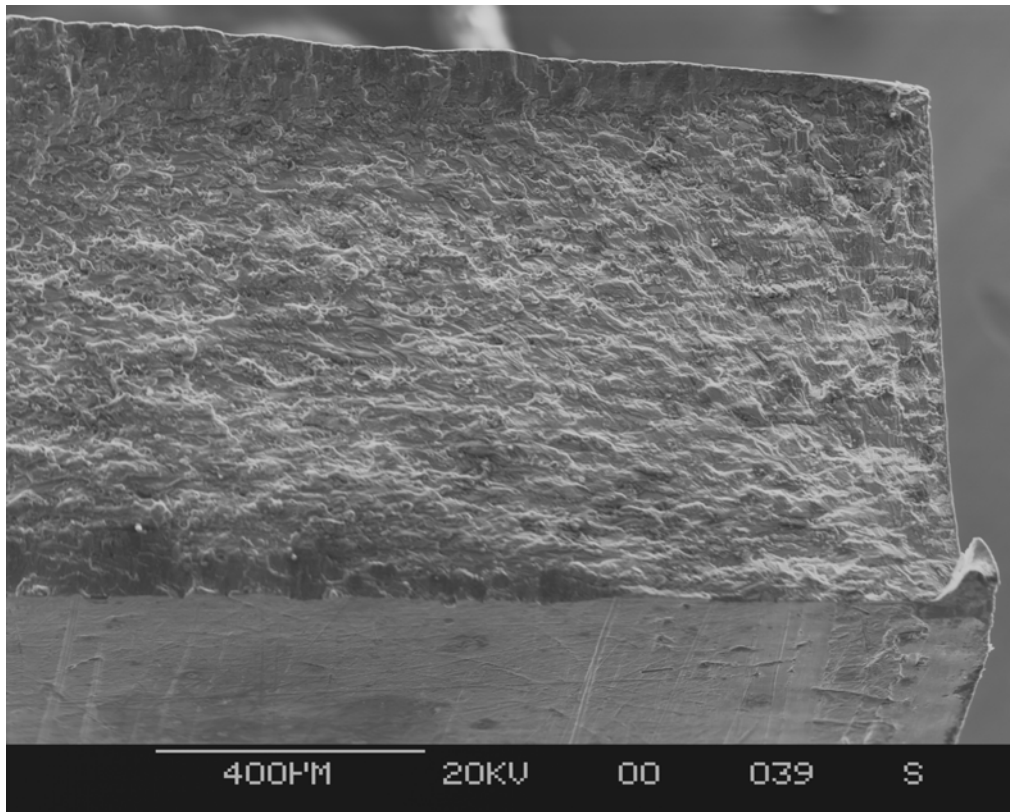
Fatigue Crack on Fracture Surface of Specimen 5829.
